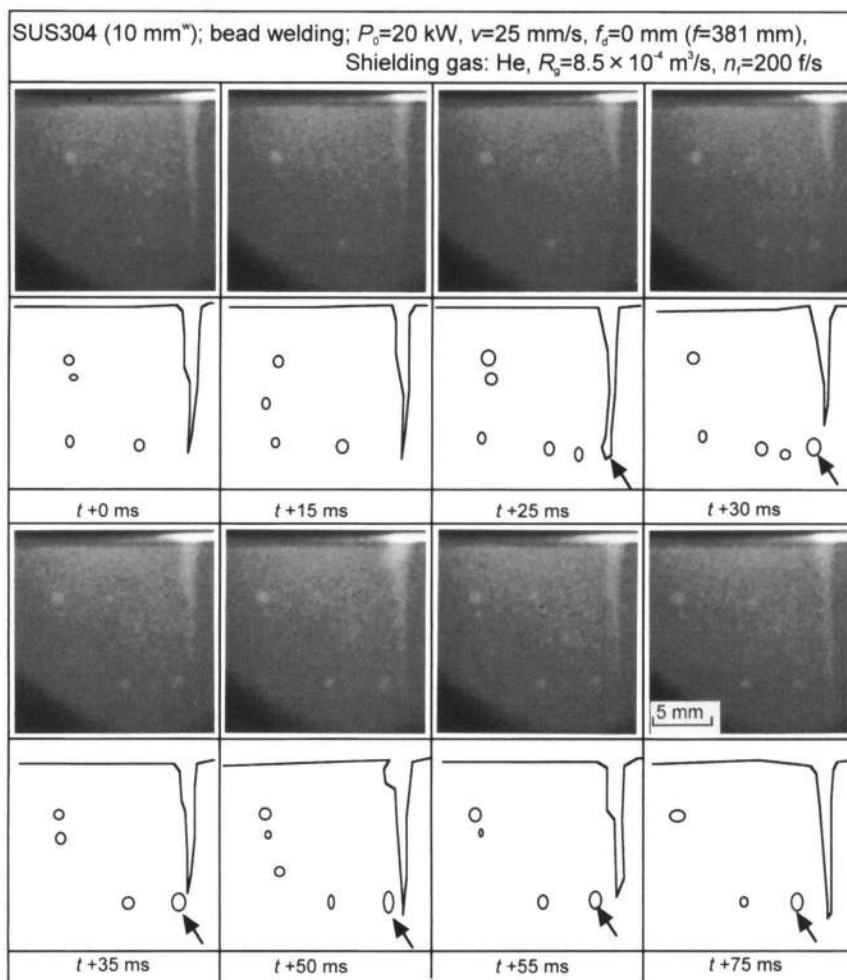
Typical example of keyhole and porosity formation behavior with schematic drawing of X-ray transmission observation of keyhole and porosity formation behavior during CO₂ laser welding of stainless steel at 20 kW.
